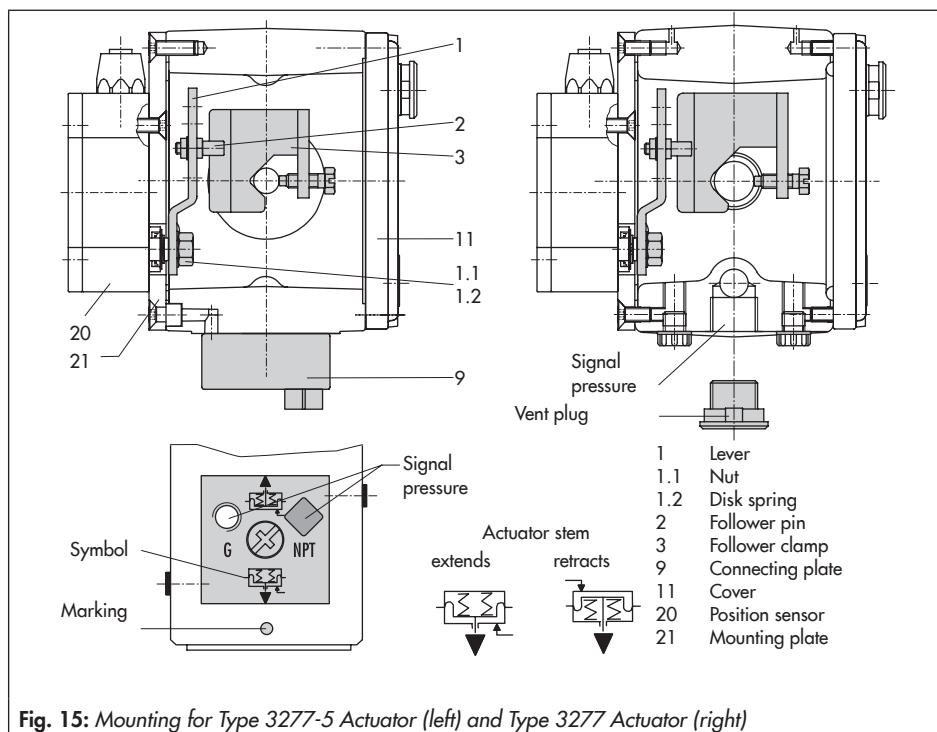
Mounting for Type 3277-5 Actuator (left) and Type 3277 Actuator (right)
